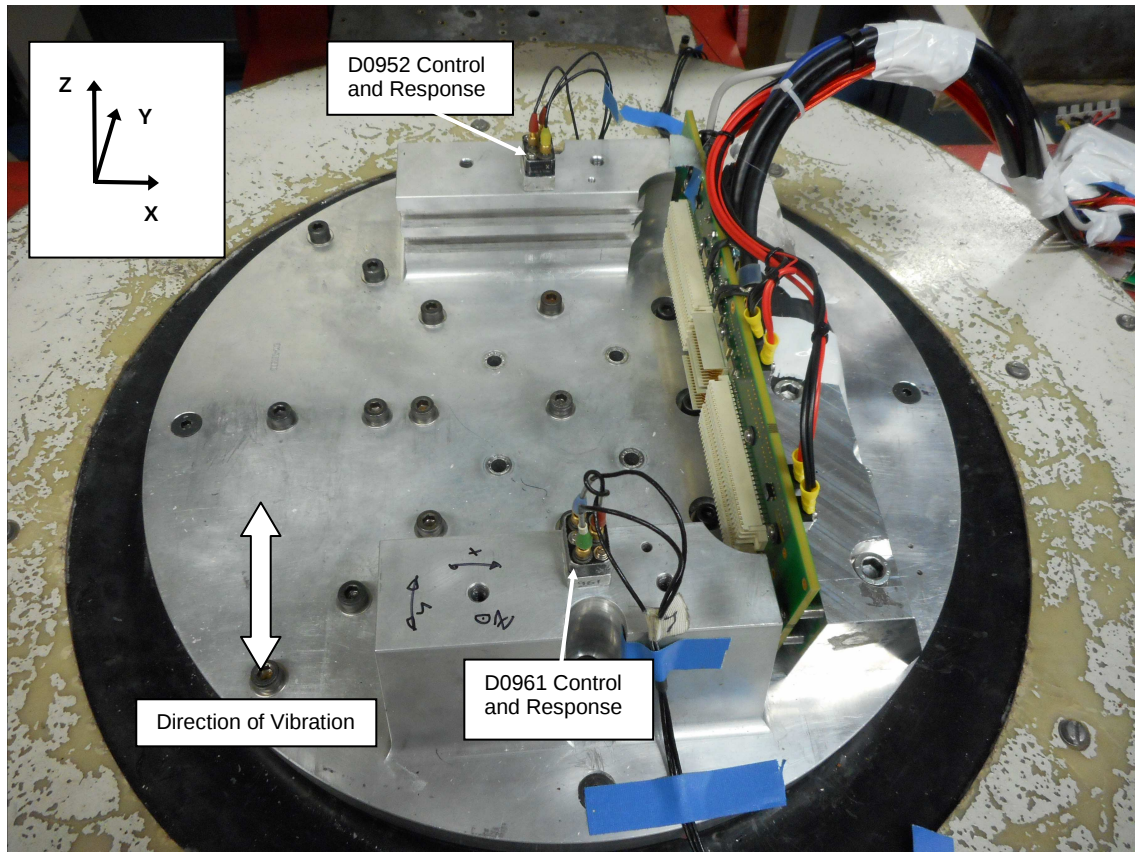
Fixture in Z-Axis for Fixture Cross-axis Measurements
